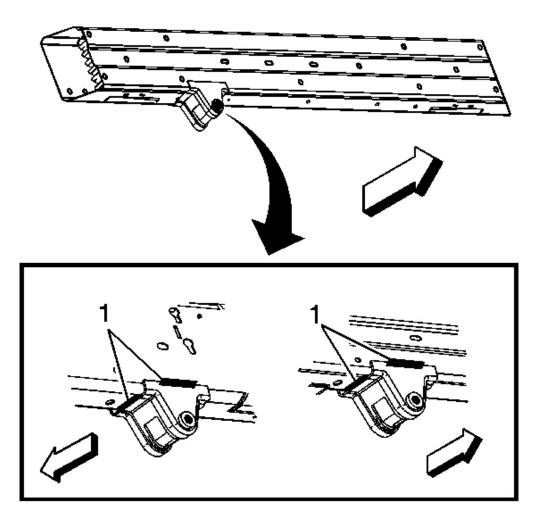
View Of Welds - Front Courtesy of GENERAL MOTORS CORP.
